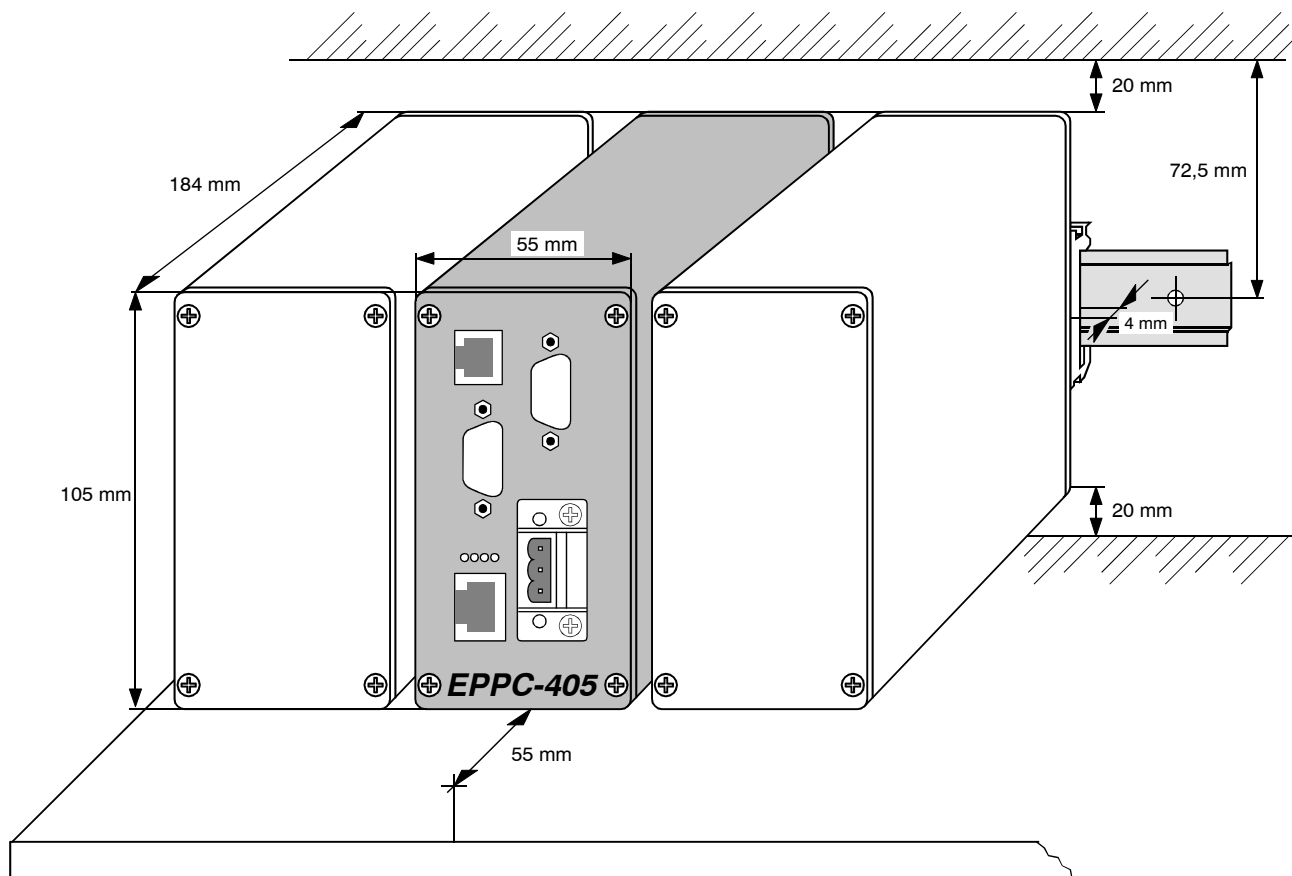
Dimensions of the EPPC-405 for installation
